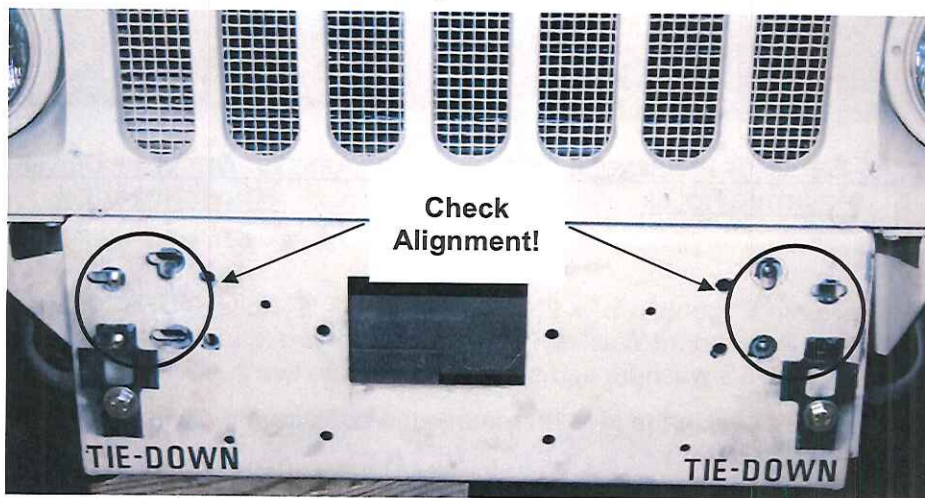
FRONT BUMPER PLATE FOR ALIGNMENT CHECK
